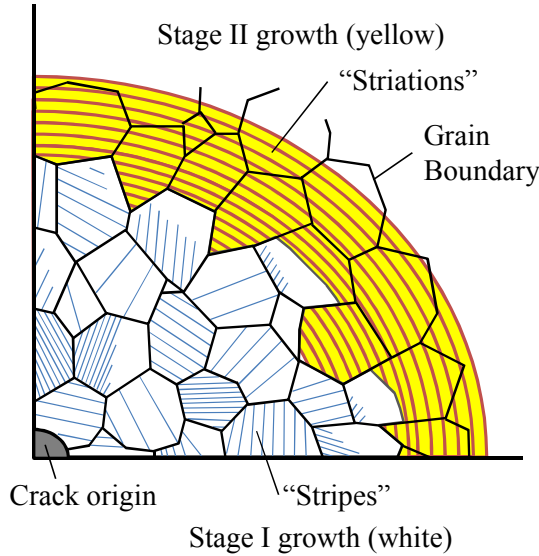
Schematic drawing of a fracture surface showing stage I and II fatigue crack growth for a near corner crack.
